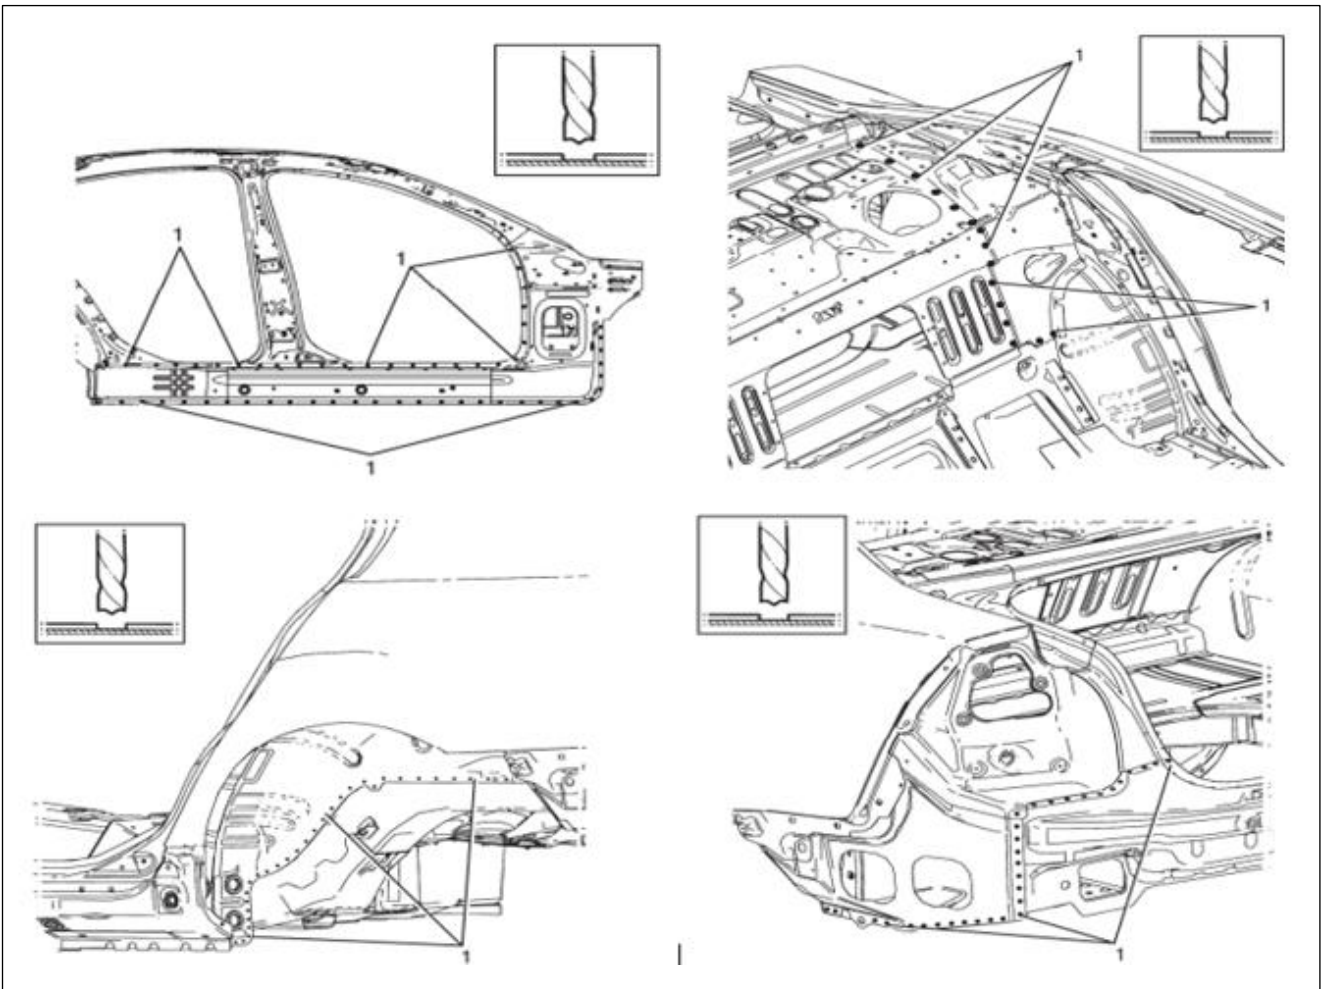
Excerpts from the GM Holden BRM procedure 'Side Door Opening Frame Replacement'.
